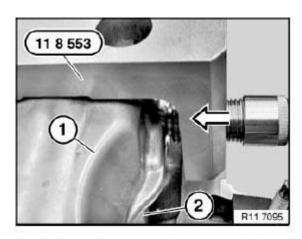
Identifying Lower Bearing Bank & Upper Bearing Bank Courtesy of BMW OF NORTH AMERICA, INC.
